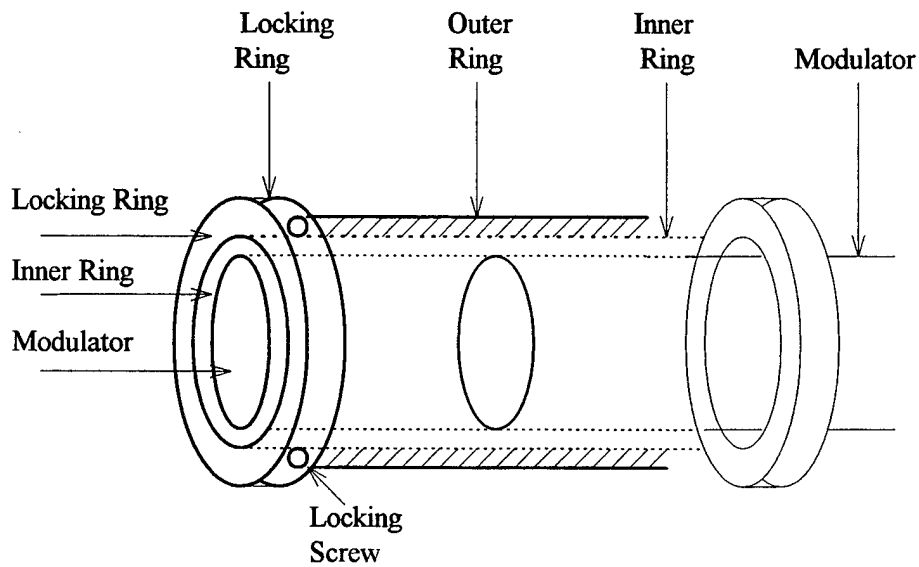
Exploded view of mounting for azimuthal rotation about the long axis of the modulator.
